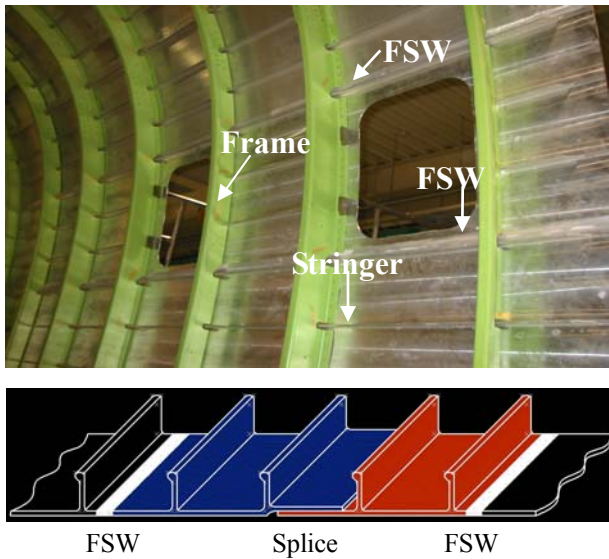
Construction of outer panel by section plate and Friction Stir Welding (FSW)
